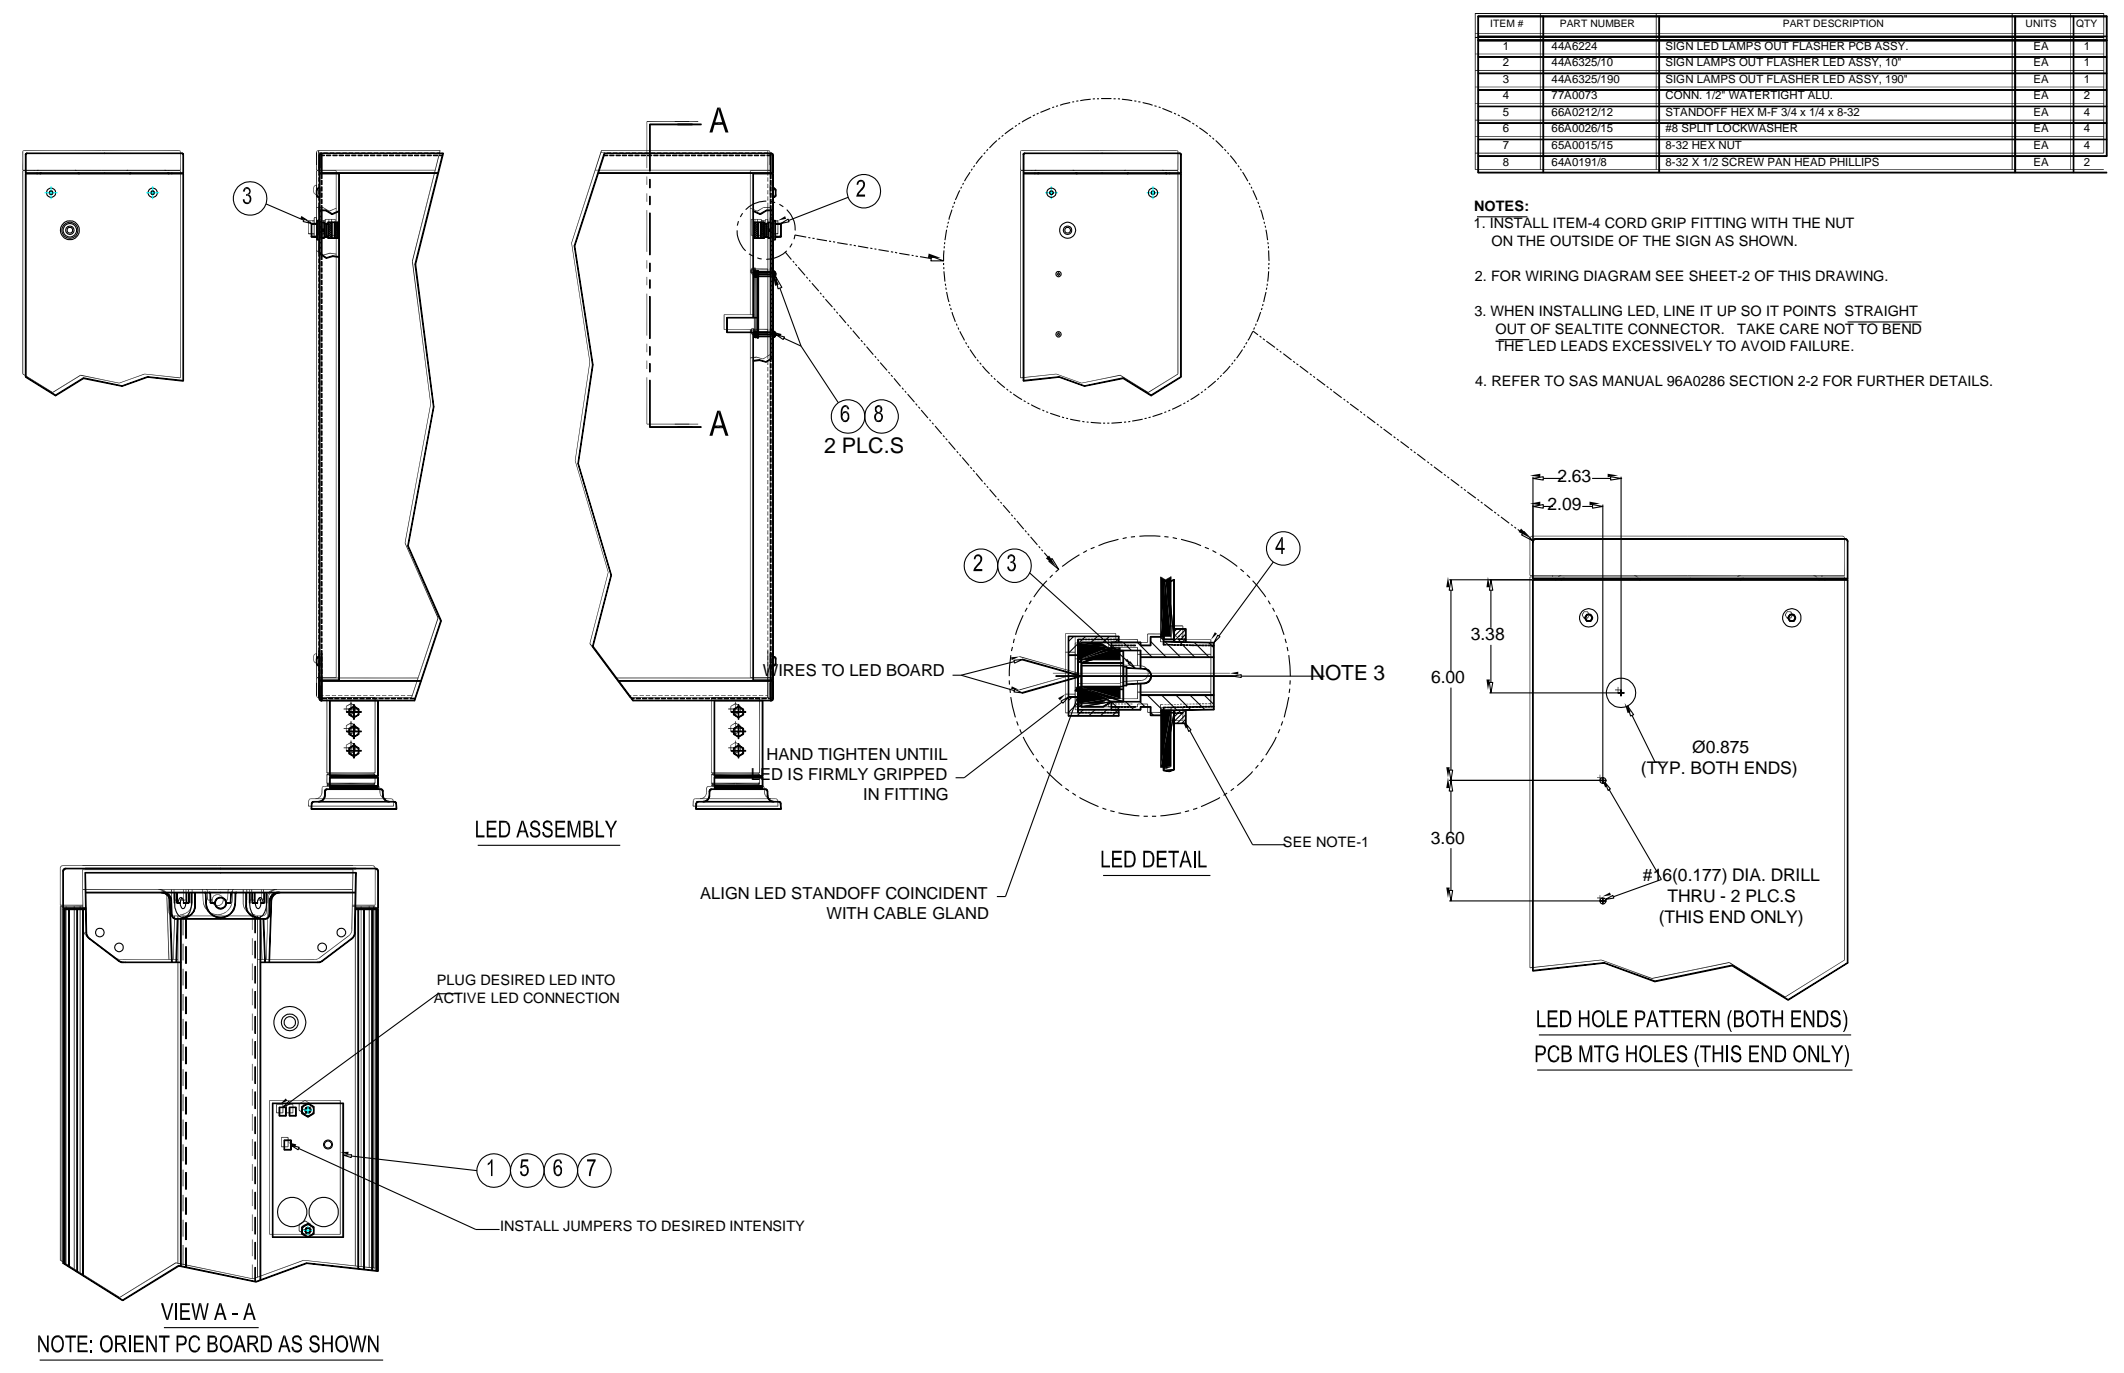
Lamps- Out Assembly Drilling Template and component Location Diagram
